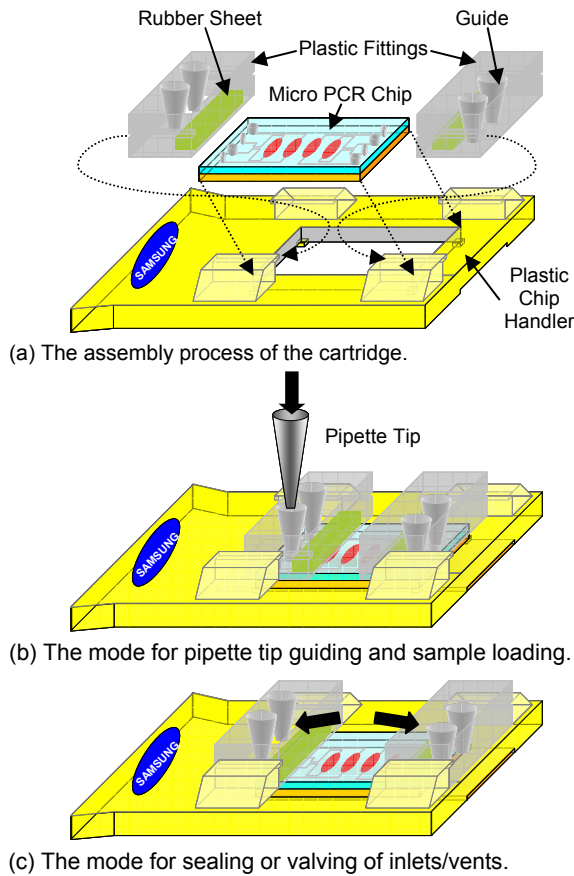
Schematic views of (a) the assembly process, (b) the sample loading mode, and (c) the sealing mode.
